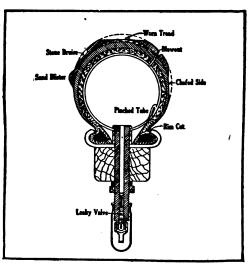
Sectional View of Pneumatic Tire Showing Defective Conditions.
